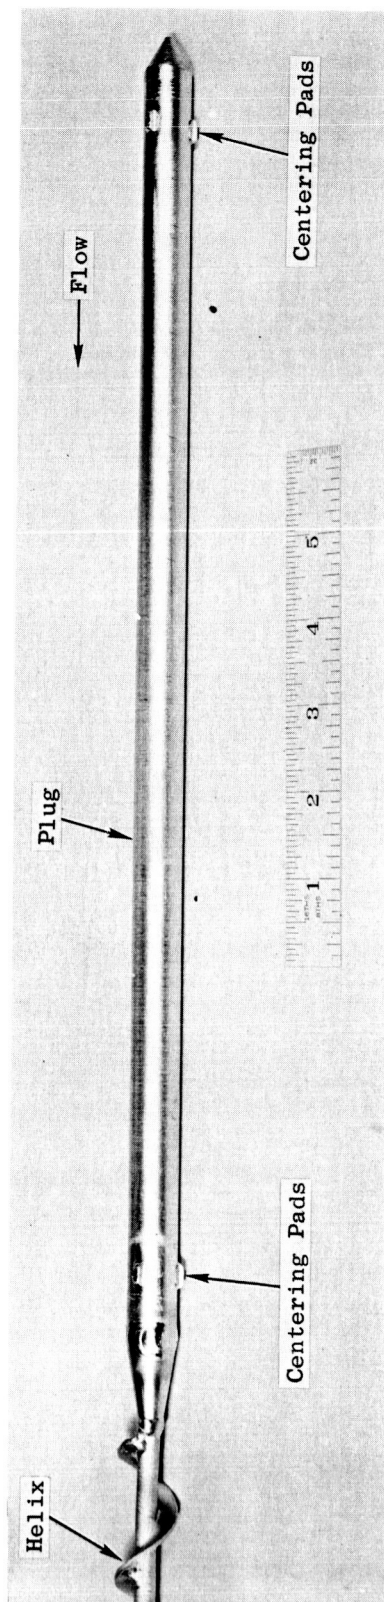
Insert Plug (Test Section No. 4, 100 KW Facility).
